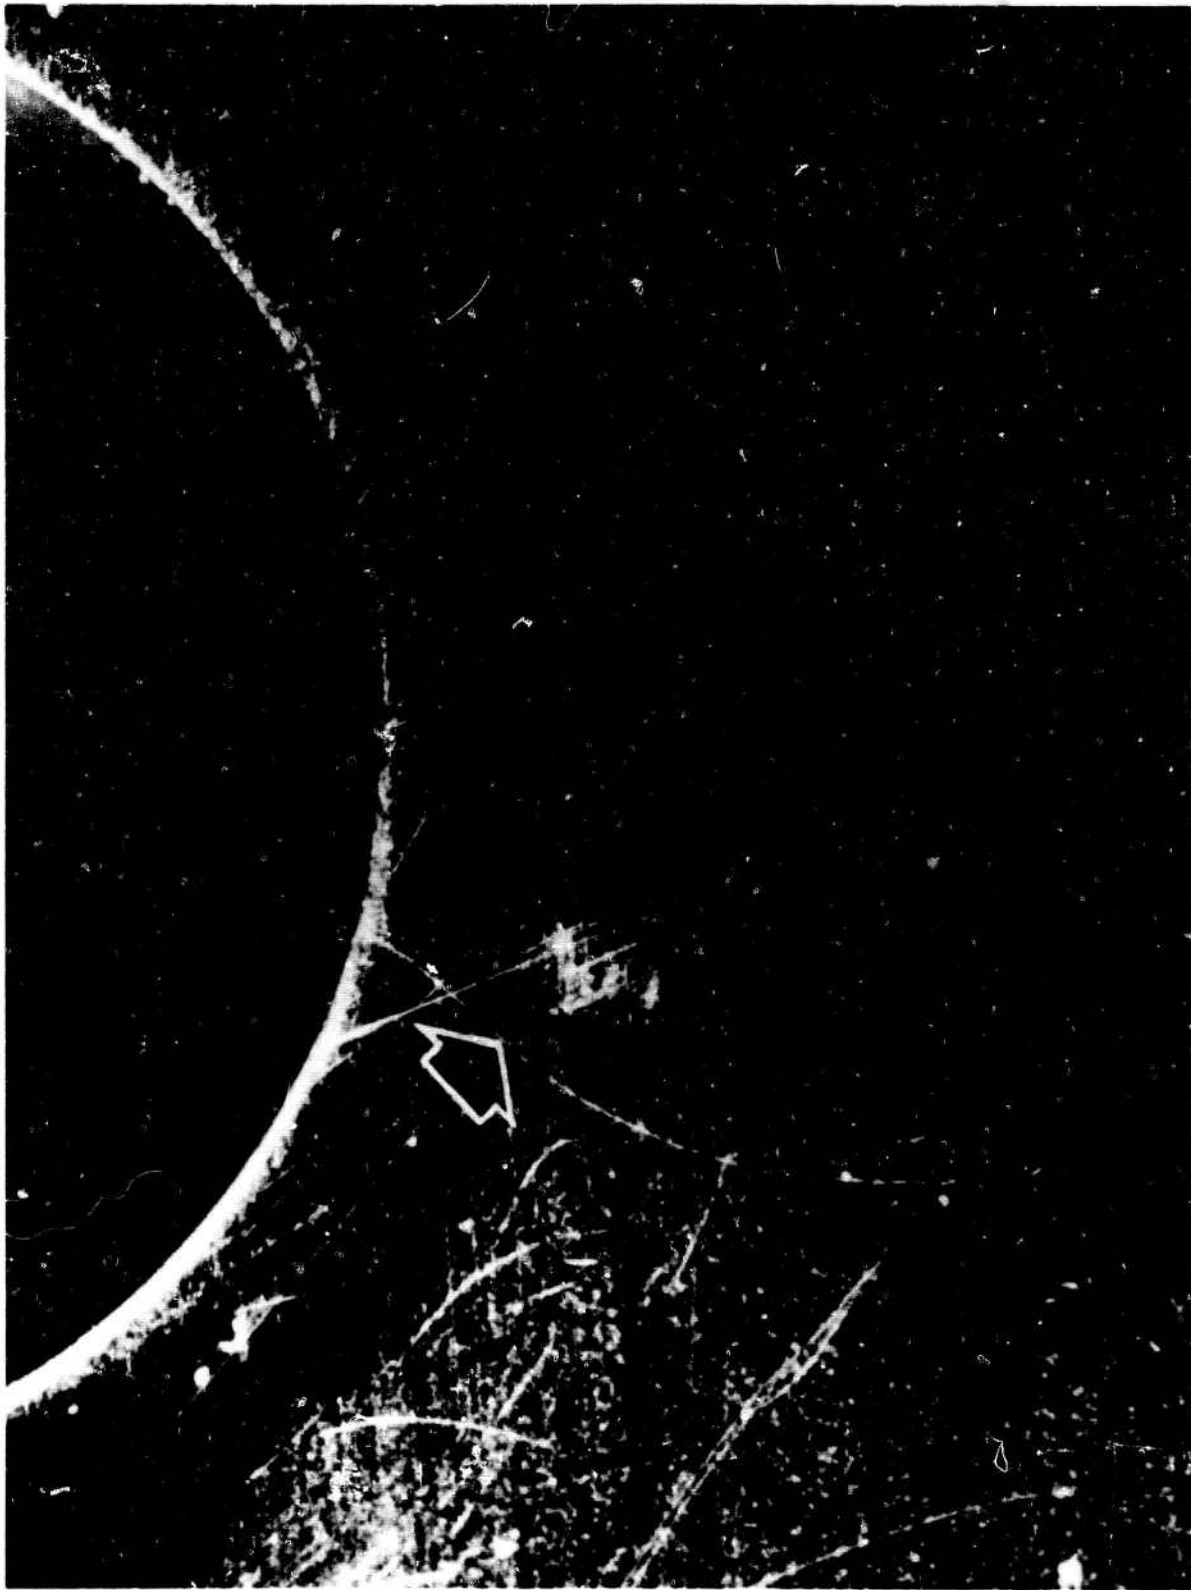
View of Rear Spar Fatigue Crack.
